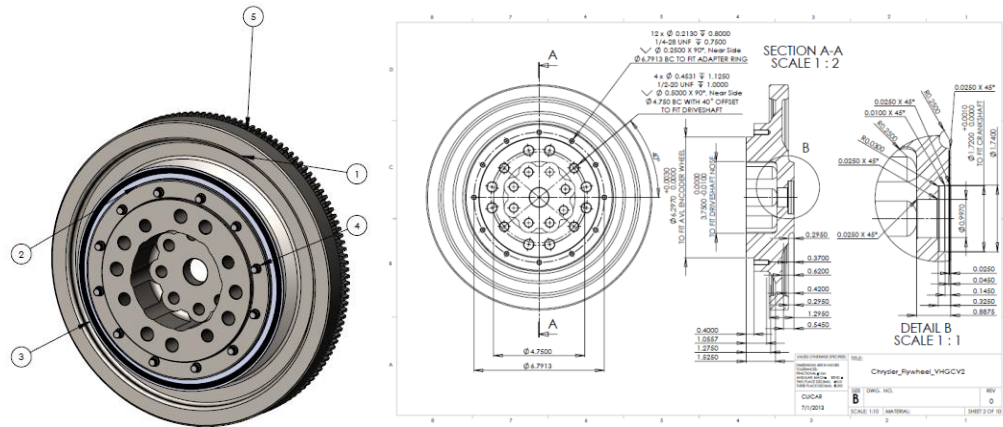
A custom flywheel was designed and built to connect the engine to the dynamometer driveshaft and hold the crank encoder disk.
